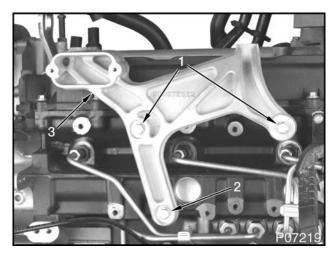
High Pressure Charge Air Cooler (HPCAC) bracket
